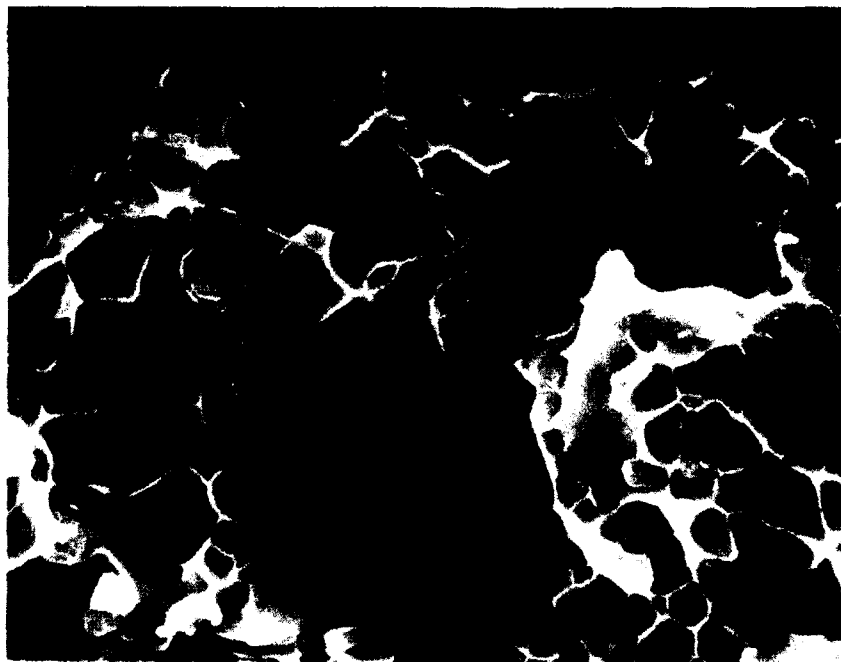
Fracture surface of 1750°C baked B_4C/Al specimen.
